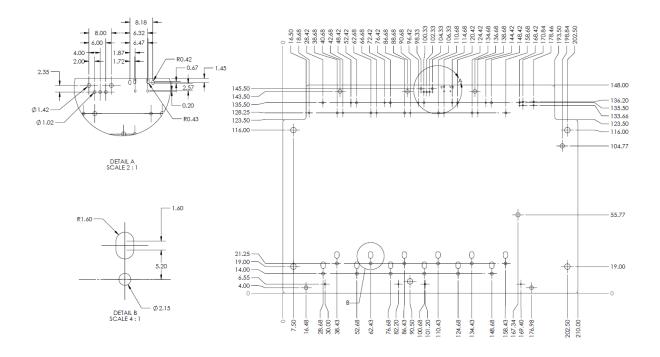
Glacier Point V2 PCB Mechanical Drawing
